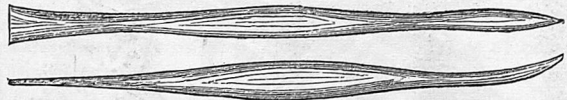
CHISEL-SHAPED TOOL, WITH BENT POINT.
